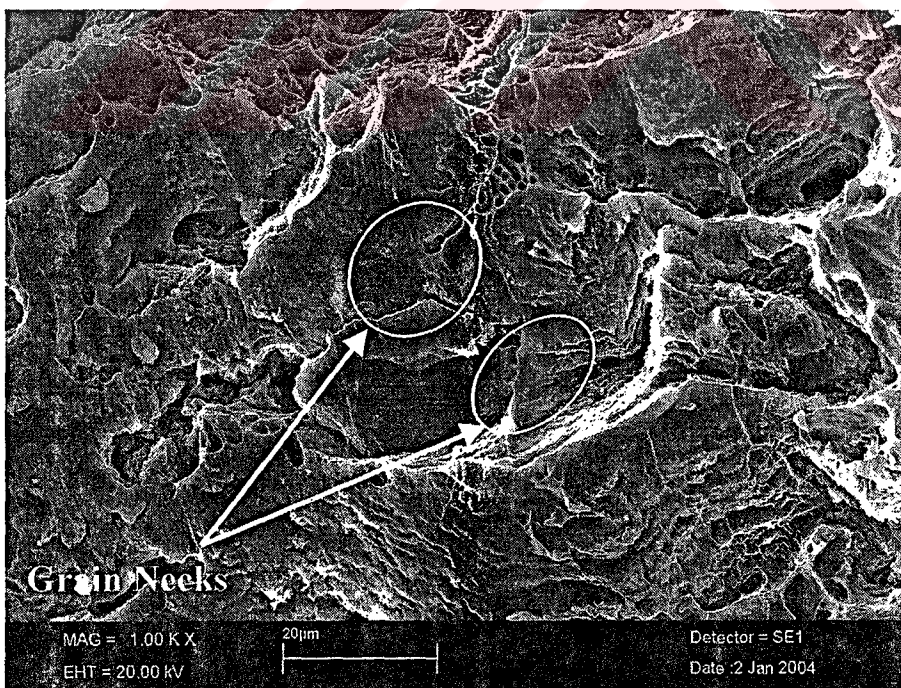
20 minutes, 640 °C sintered Al part for 600 MPa
